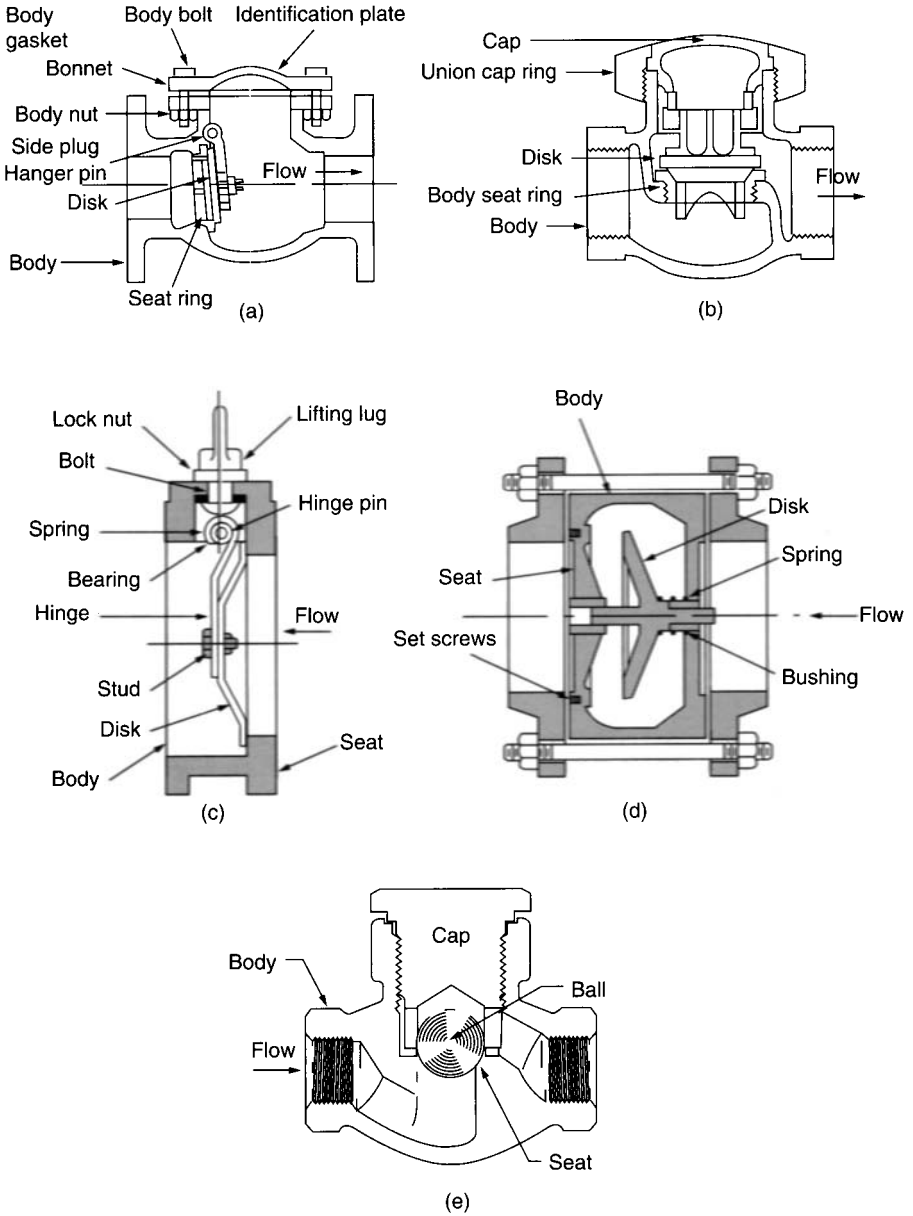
Check valves. (a) Swing check; (b) lift check; (c) single flapper wafer check; (d) double flapper wafer check; (e) hall check.
